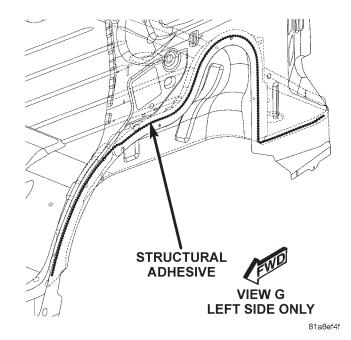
BODY IN WHITE WITHOUT ROOF (2 OF 2)
